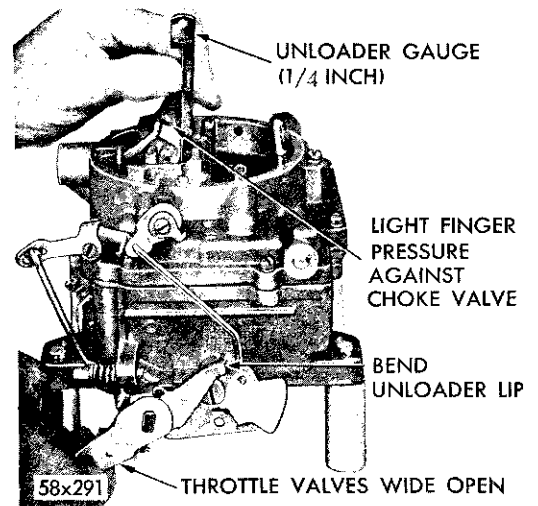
Checking Choke Unloader (wide open kick) Adjustment
